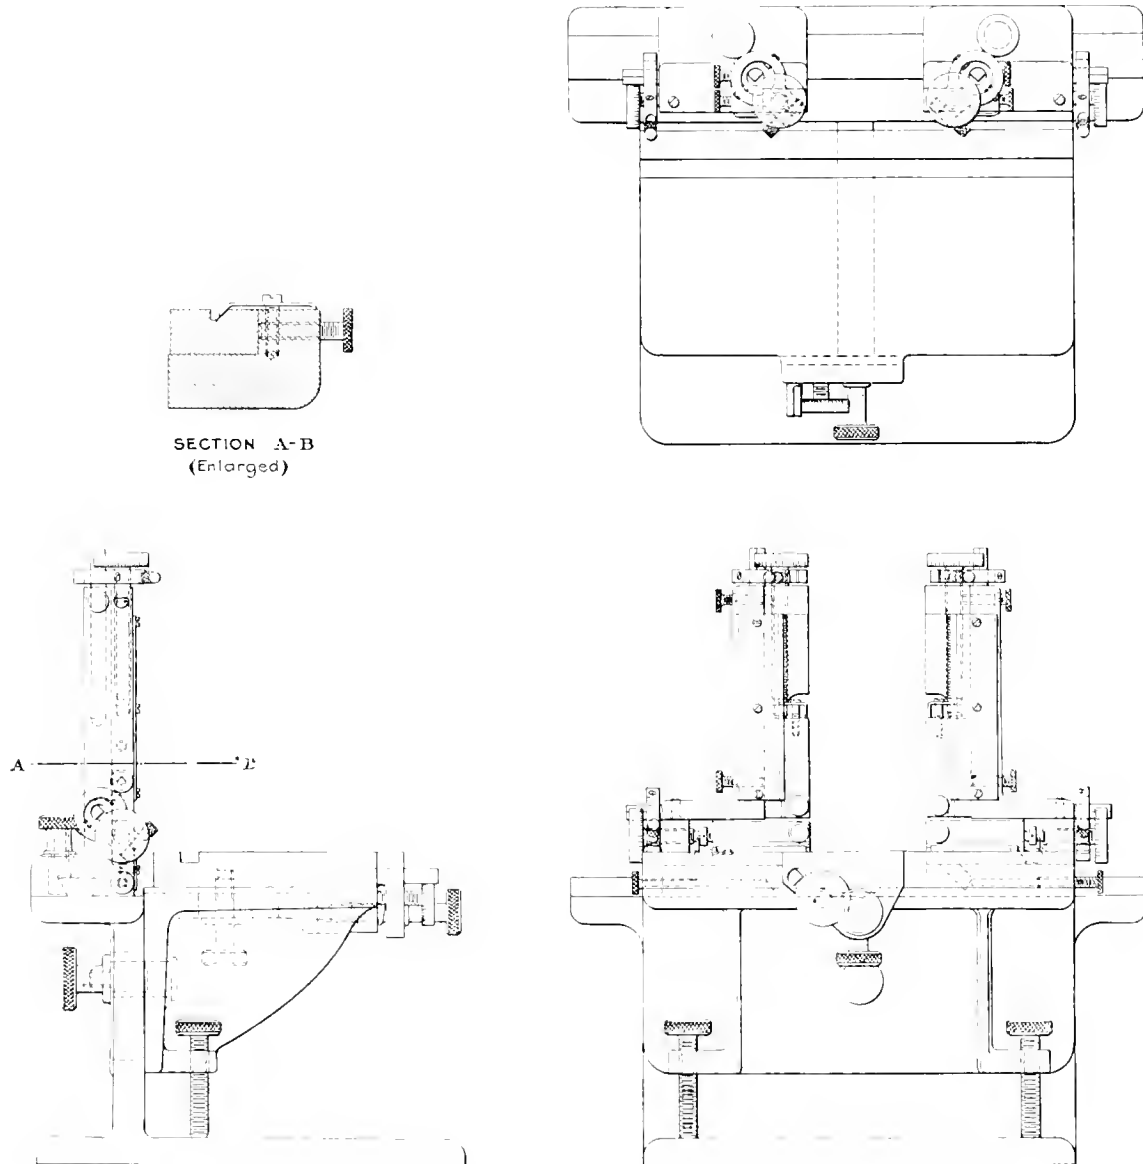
PROJECTION MACHINE FOR INSPECTING SCREW THREADS
